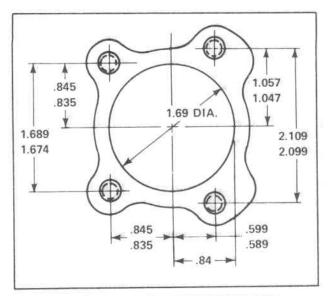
EXHAUST FLANGE DIMENSIONS.
